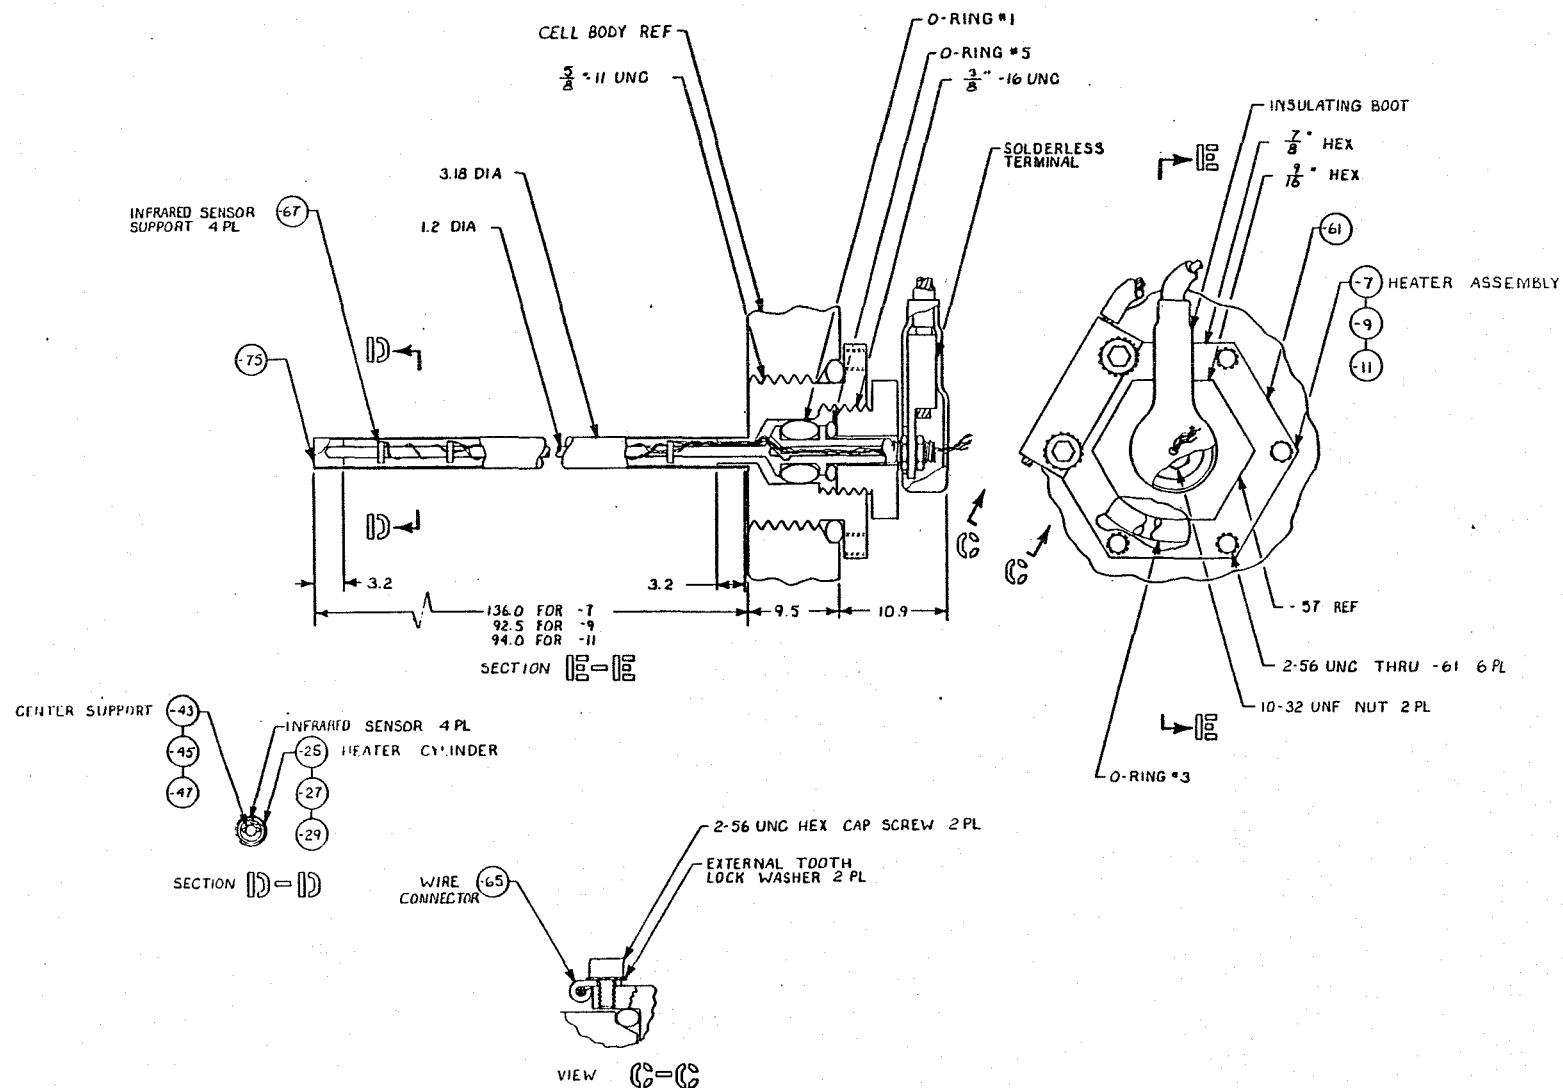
3.18 mm DIAMETER HEATER DESIGN
